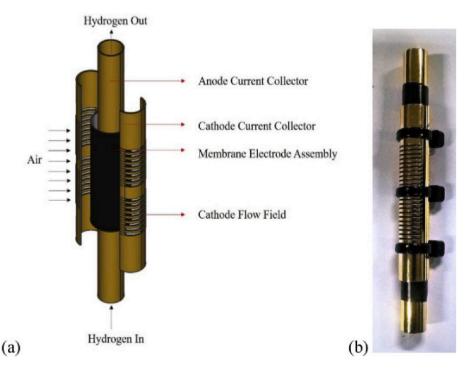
A cylindrical PEFC: (a) an exploded view of the fuel cell and (b) a picture of the assembled fuel cell. Reprinted with permission from Elsevier [74].
